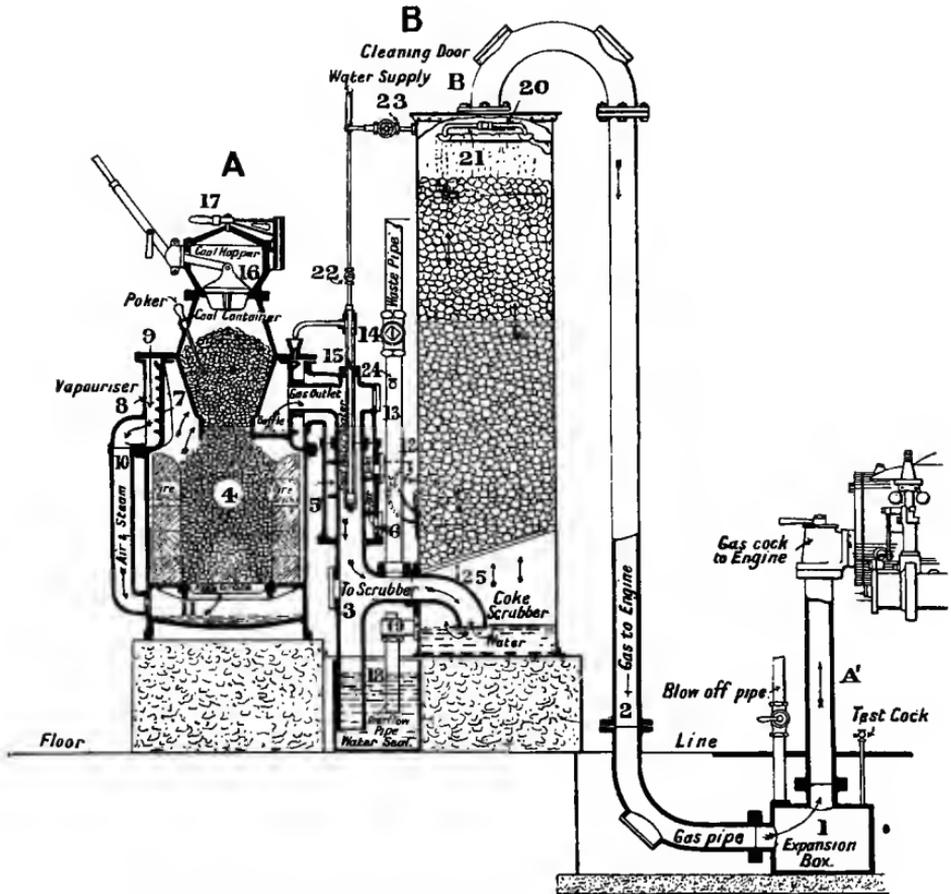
Section through National Producer shewing connection to engine cylinder.
